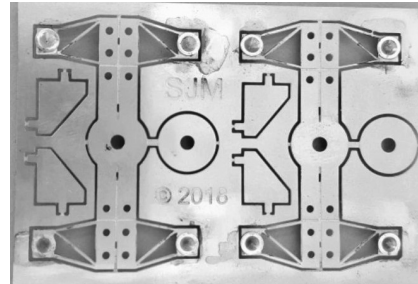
Thow archbar bogie etch showing correct orientation of the waisted bearings. Tabs on the angle brackets fit into the small slots on the bolster and side of the frame and can be twisted with pliers to secure the bracket prior to soldering.
